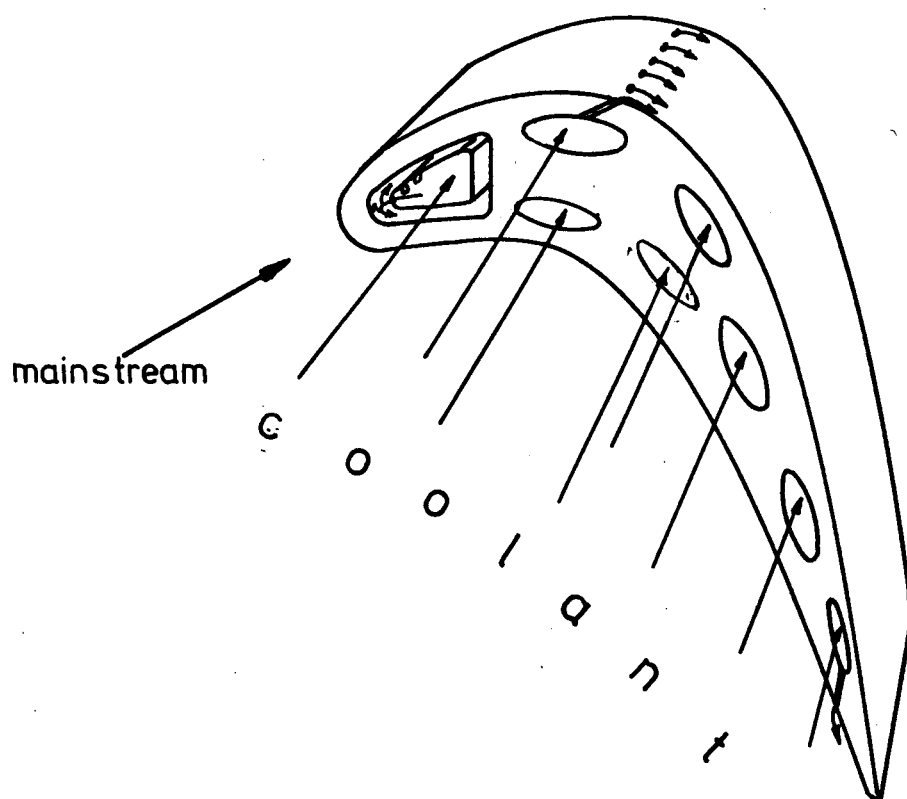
Cross-sectional drawing of an hypothetical cooled turbine blade
